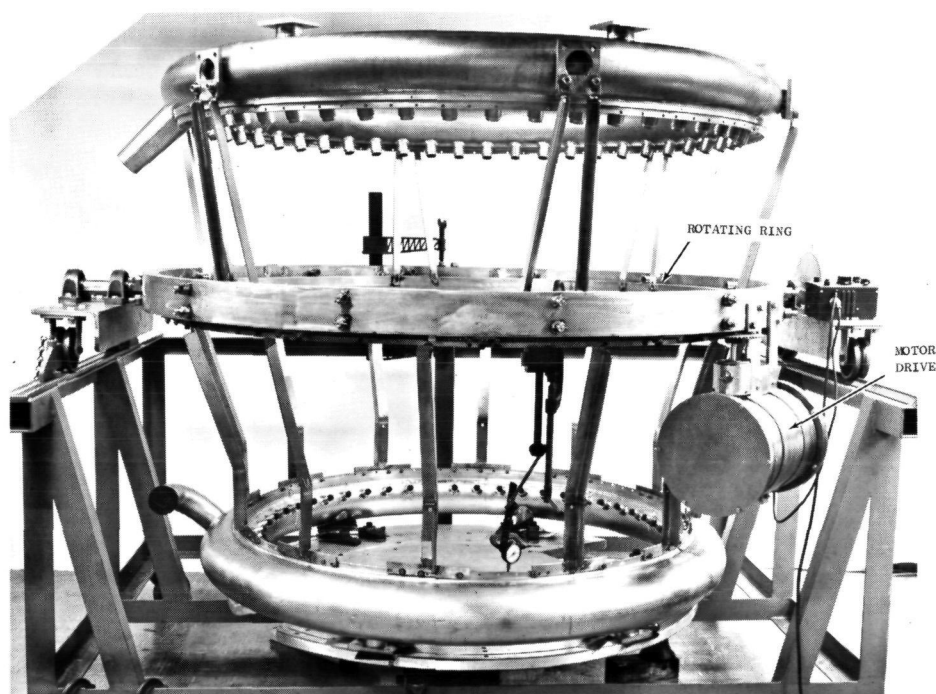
Manifold Mounted on Rotating Weld Fixture. (P69-9-35C)
